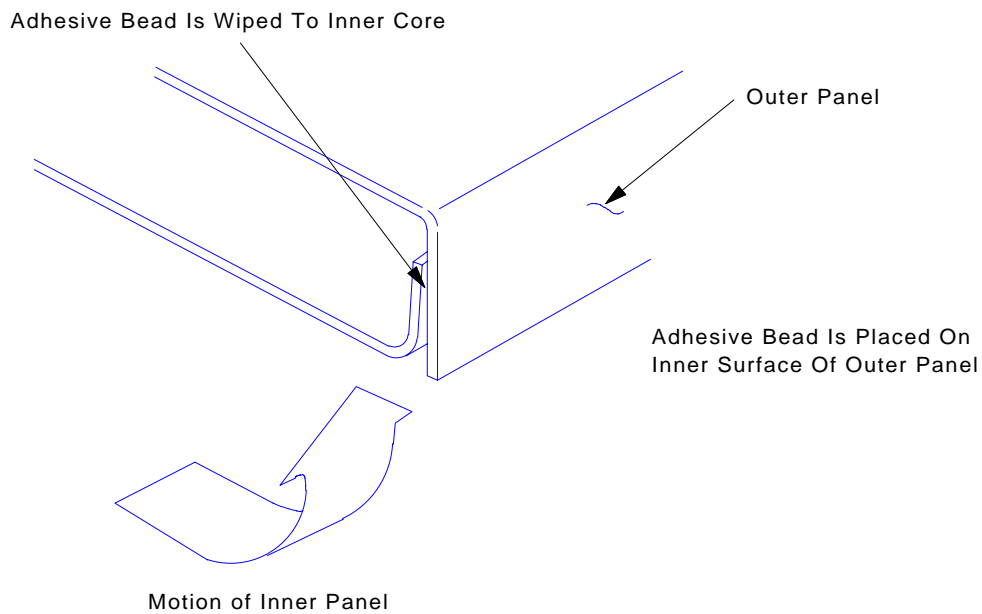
Adhesive squeeze out controlled by assembly operation¹⁸
